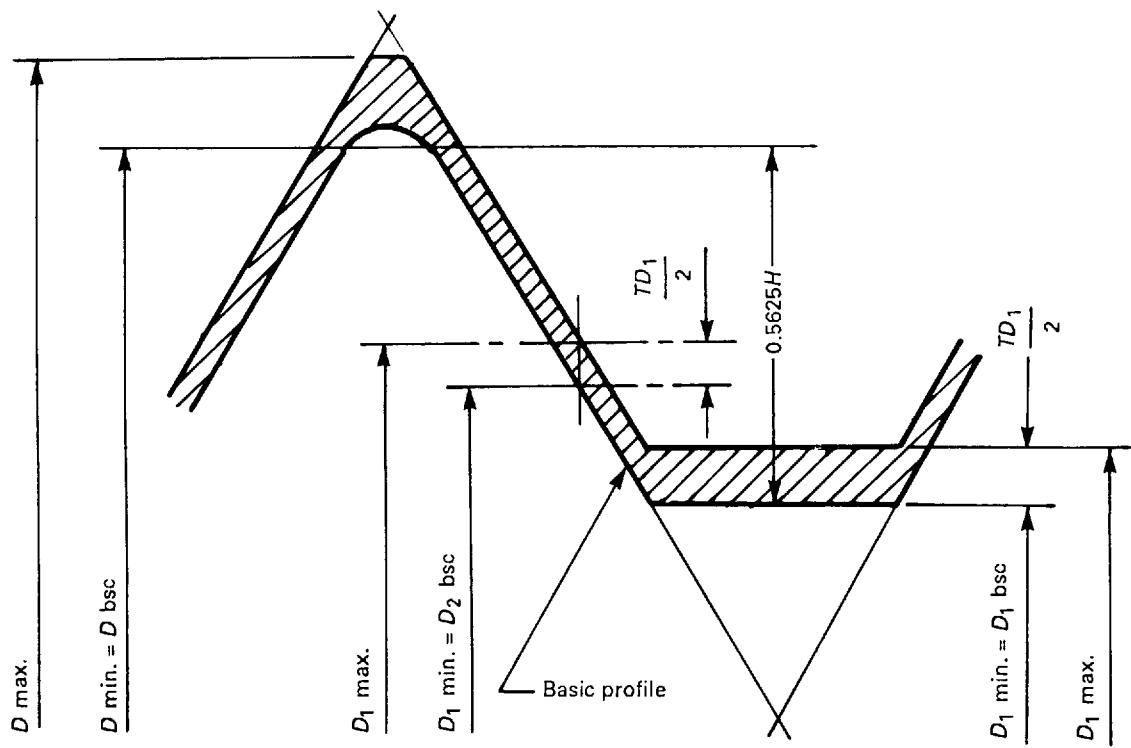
INTERNAL UNJ THREAD DESIGN PROFILE AND TOLERANCES
